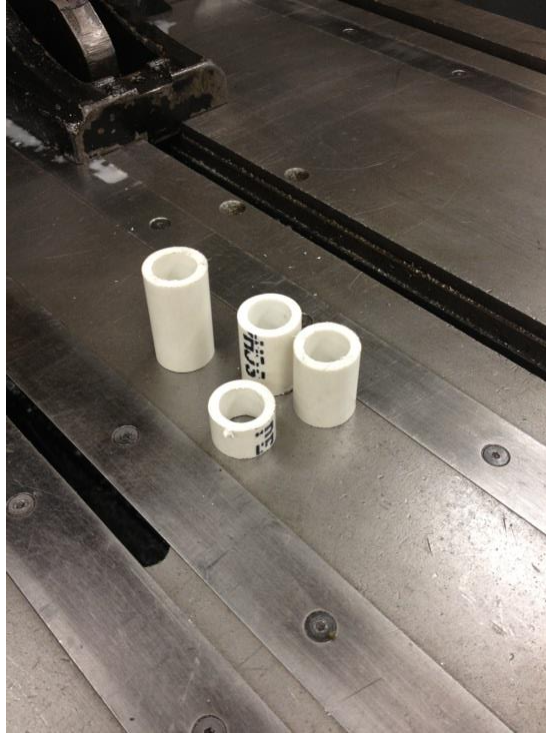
Half Inch Schedule 40 PVC Pipe Spacers.
